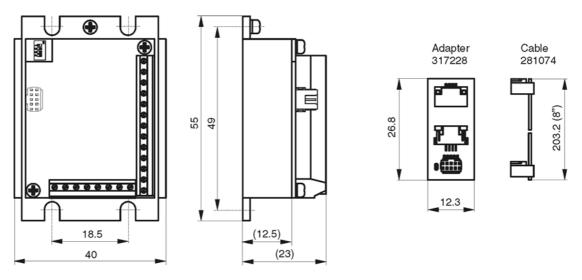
Dimensions EPOS 24/1 for EC 6 motor 317270
